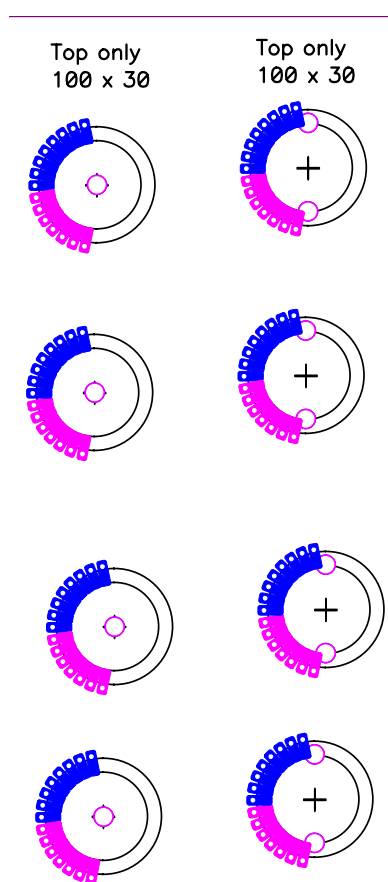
The printed circuit board design for the sample holders. The left is for the old system, with the hole for the screw in the middle. The right is for the new system, with the holes on the edge and the cross indicating the center for positioning purposes.
